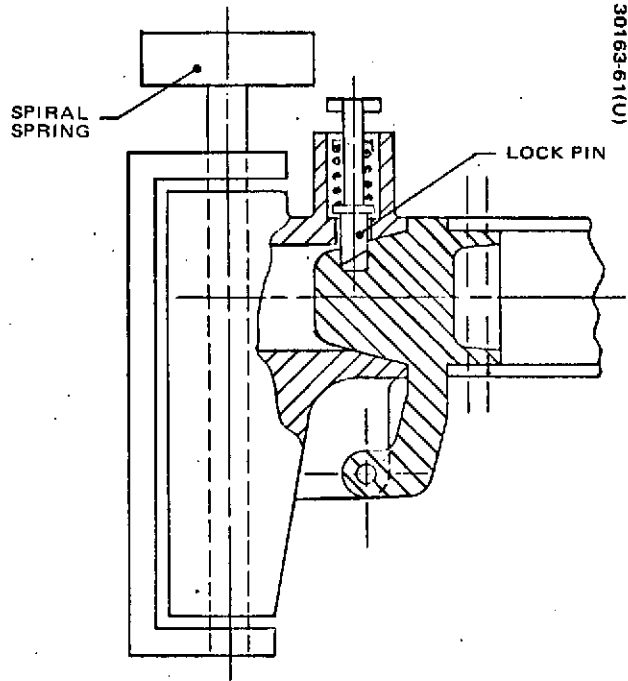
MAGNETOMETER BOOM HINGE AND LOCK MECHANISM
